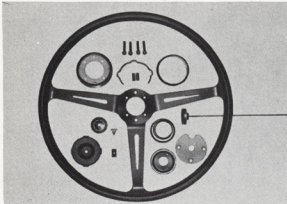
Inspection of Steering Wheel Related Parts V1298
